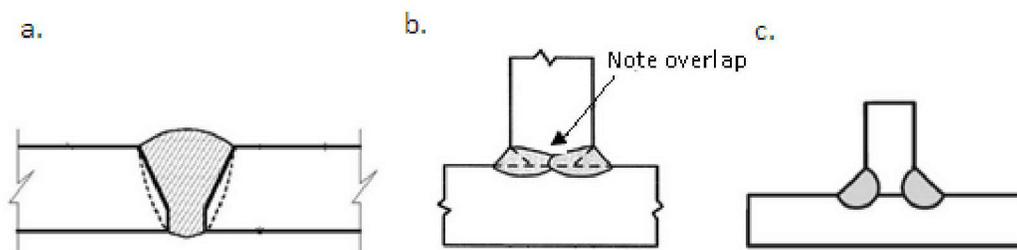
Weld Types used in Tank Liners (a) 3-pass full penetration square butt weld, (b) double bevel fillet weld, (c) double fillet weld (AWS B1. 10M)
